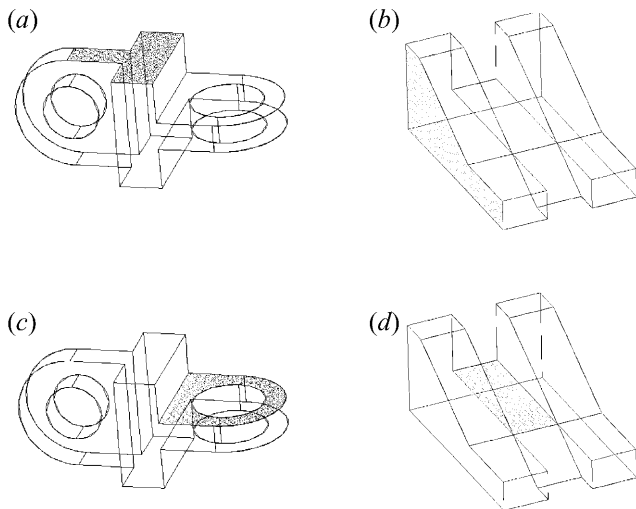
Segmentation of surfaces from a cloud of 3D points registered with the CAD model of the part. (a) Surface 1 of part two. (b) Surface 2 of part one. (c) Surface 12 of part two. (d) Surface 7 of part one.
